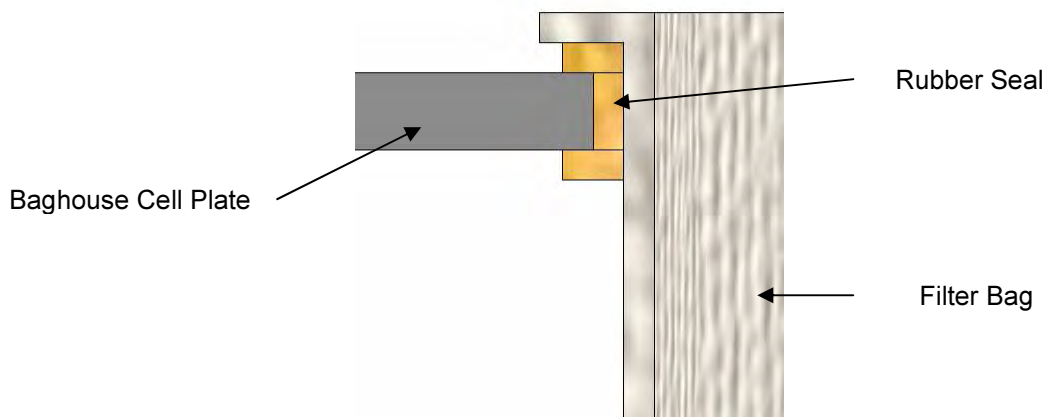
Left hand side cross section of laboratory scale baghouse cell plate showing rubber seal and filter bag
